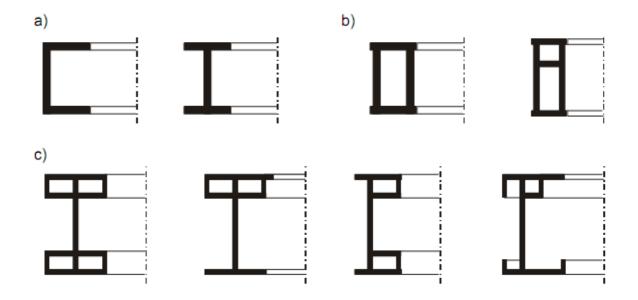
Schematic display of support surfaces for radial-axial bearings bond: a)open; b)closed; c)open- closed;
